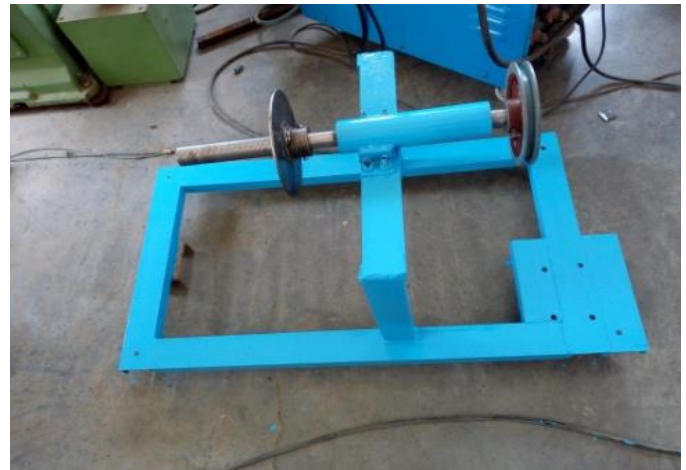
Mechanical Component (frame) of the Wheel Balancing Machine
